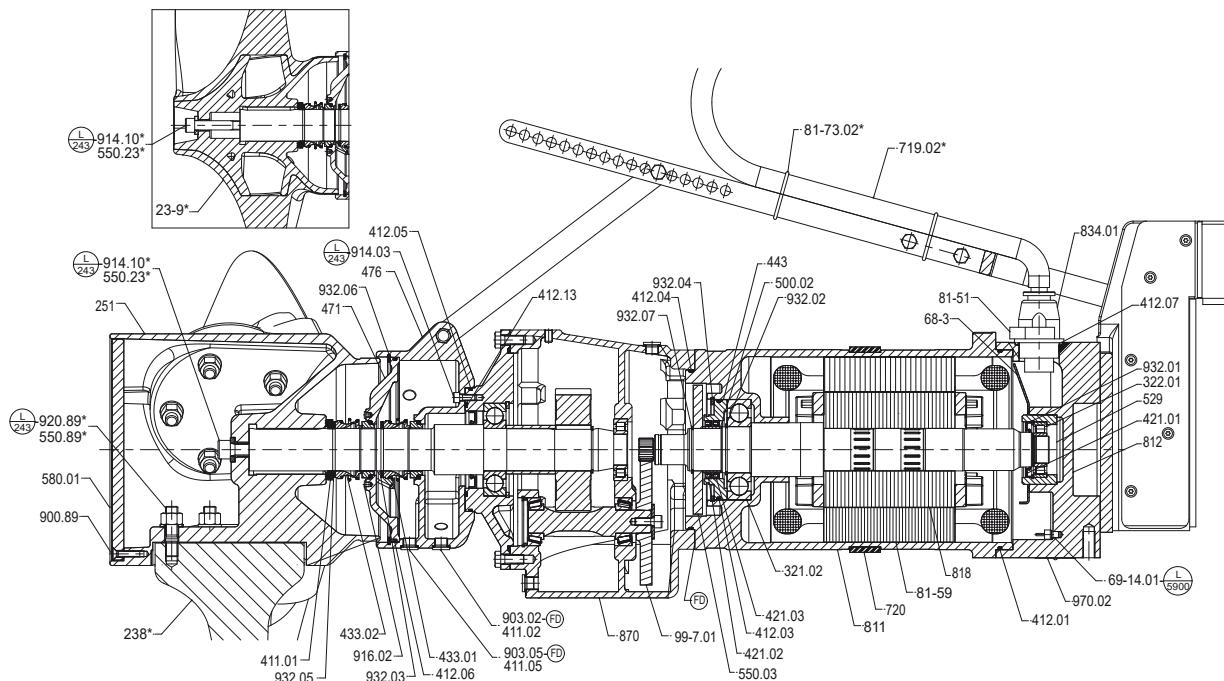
General assembly drawing AmaProp, sizes 1202, 1402, 1403, 1802, 2200, 2203, 2500, 2603 three-phase asynchronous motor
